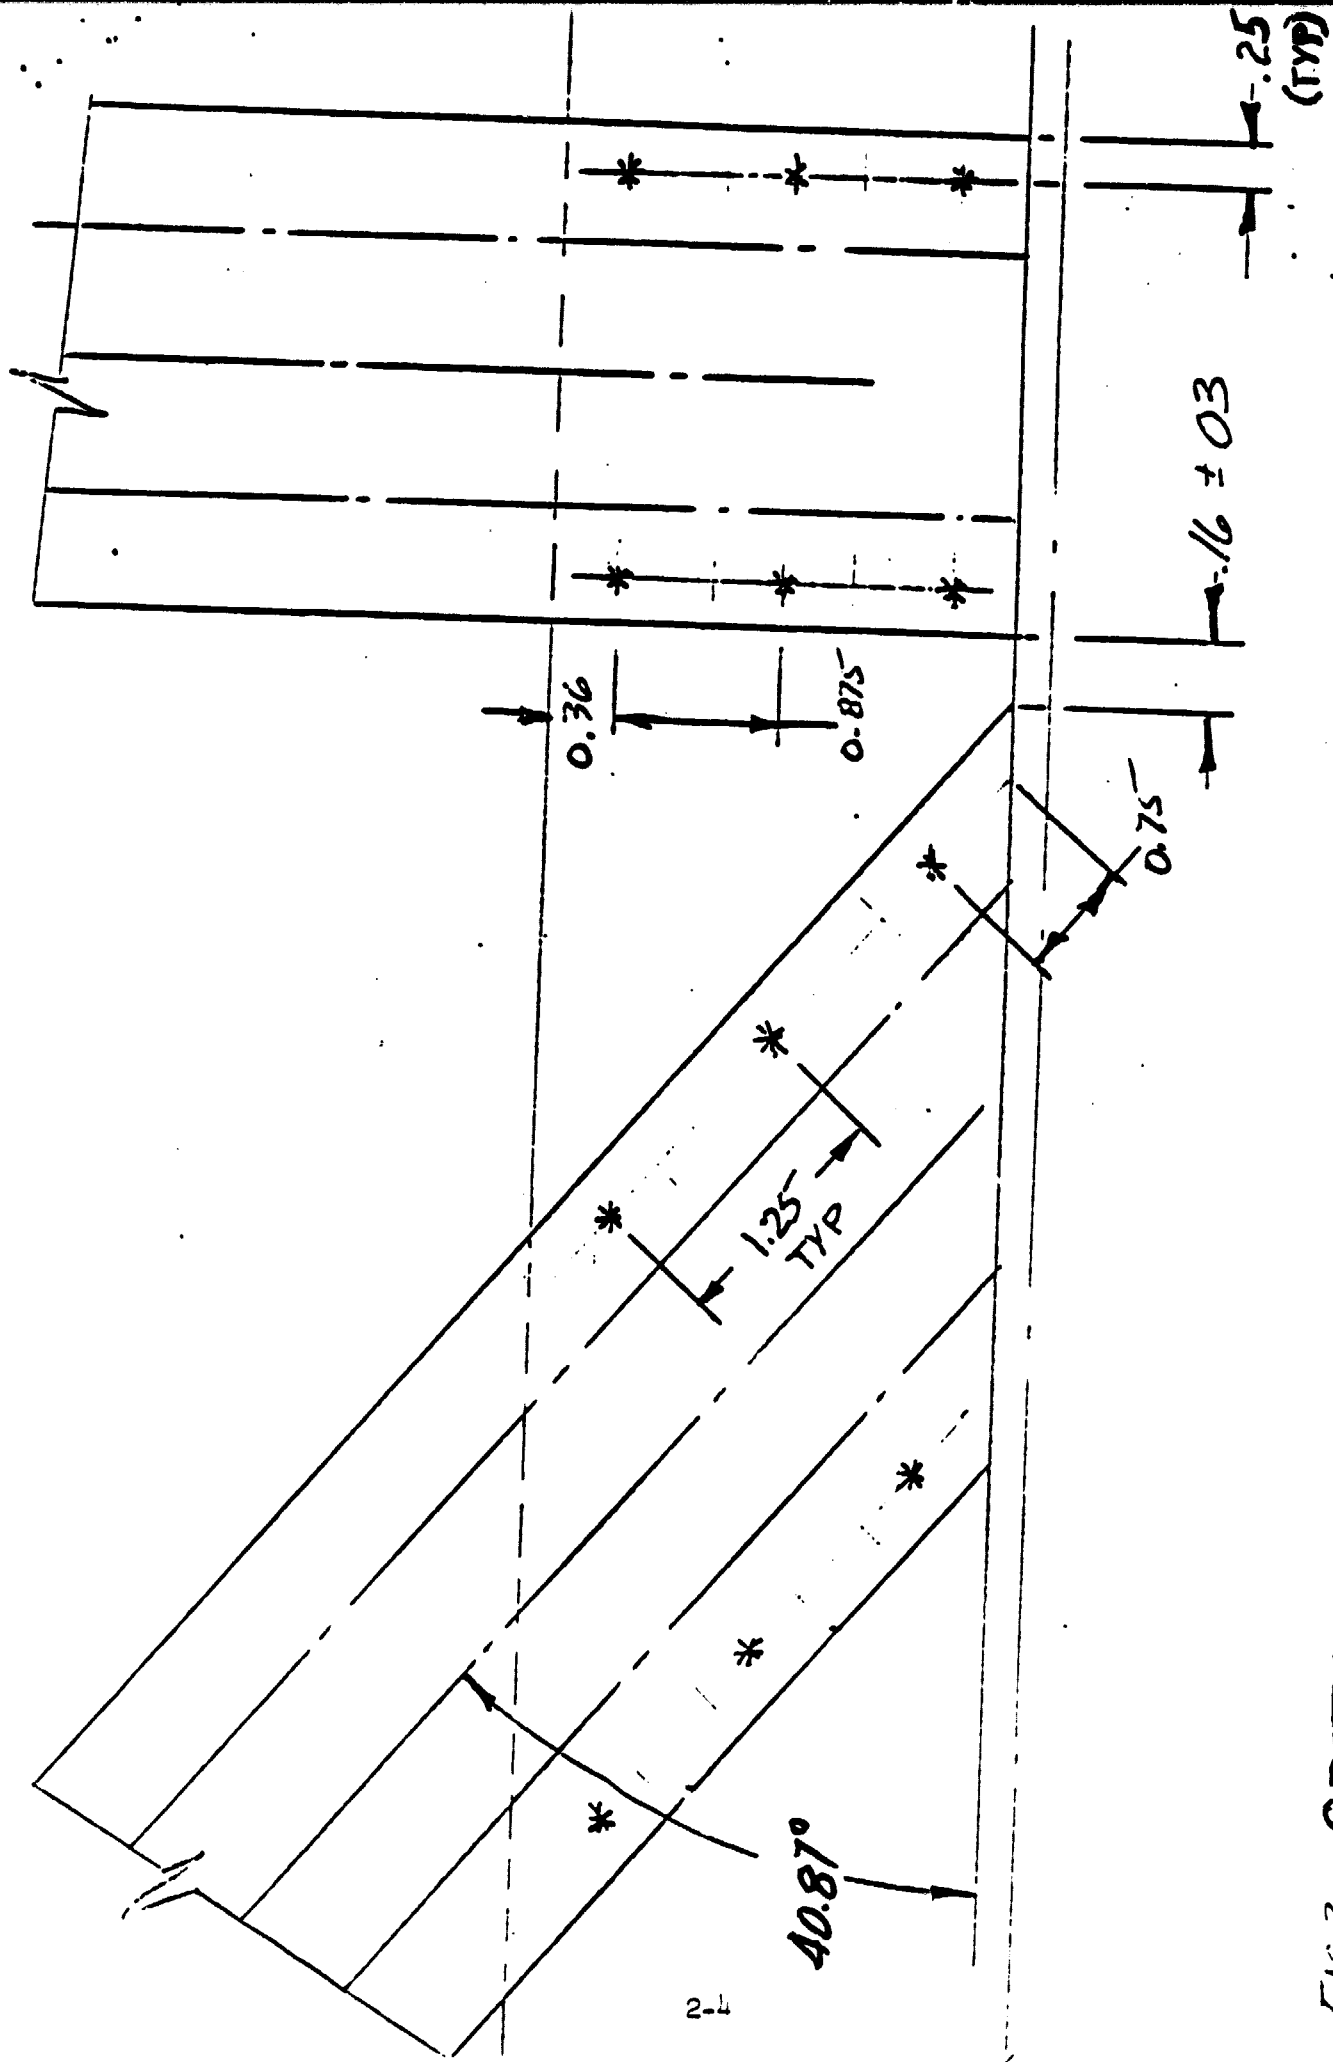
SPOT WELD CONFIG.3 C WELD/JUNCT ~ MIN SPACING
